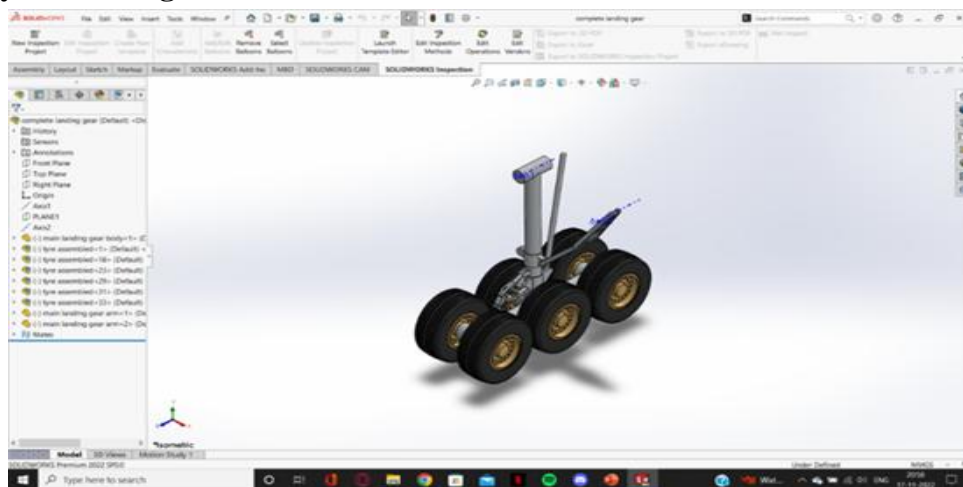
Triple Bogie Landing Gear Designed using Solidworks
